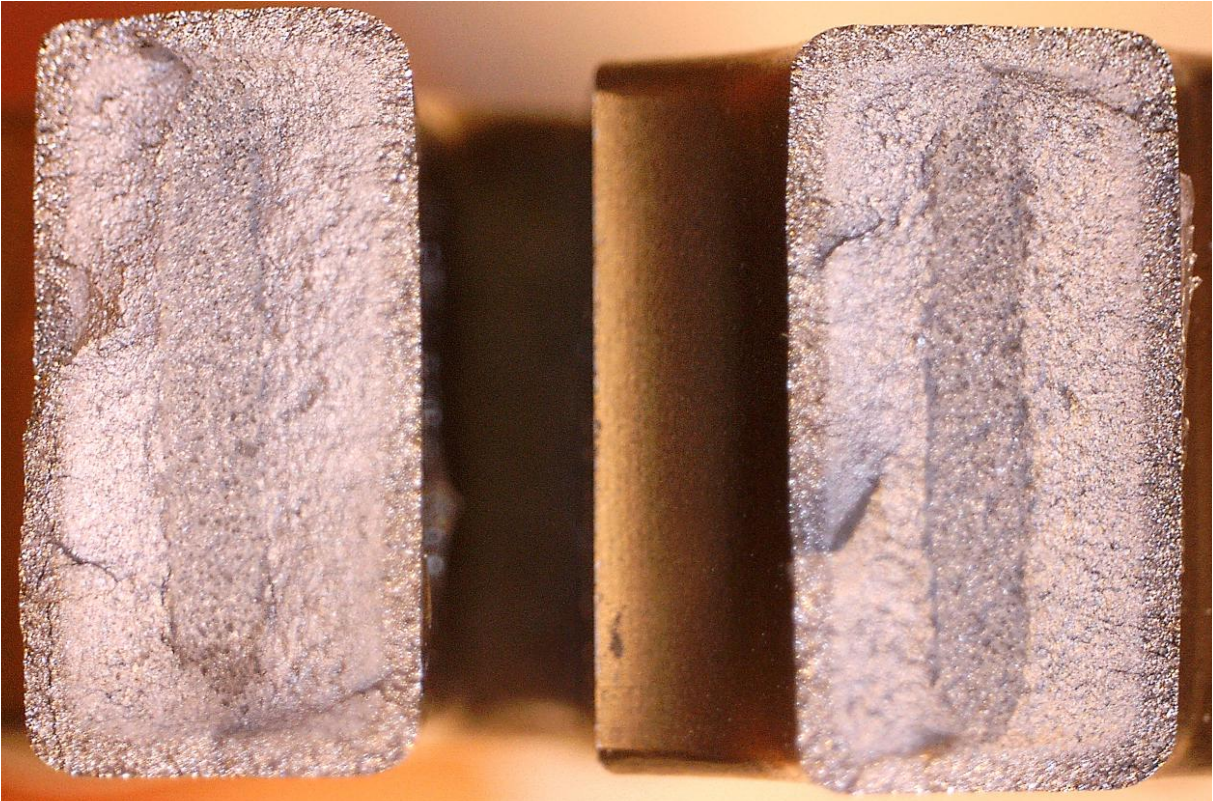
Fracture surface of specimen IT201A-9B, $2N_f=1,320$
